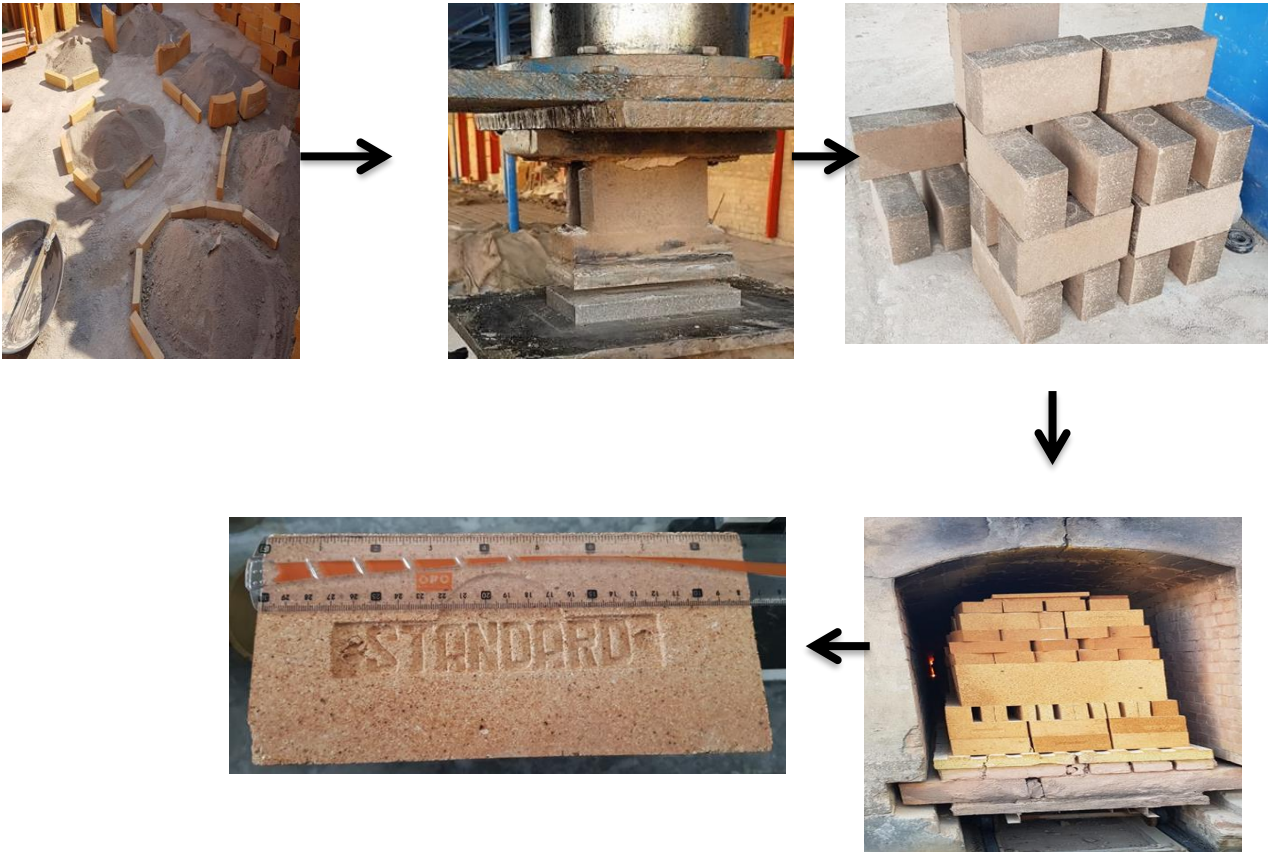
Process of brick making from mixing, pressing, drying, firing and final brick
